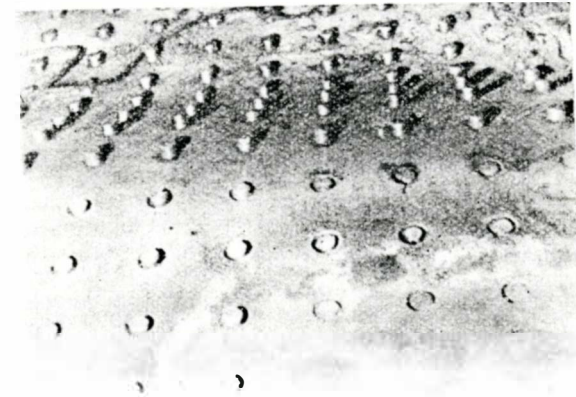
(top) GROOVES ROUND STAY ENDS PREPARED FOR WELDING
